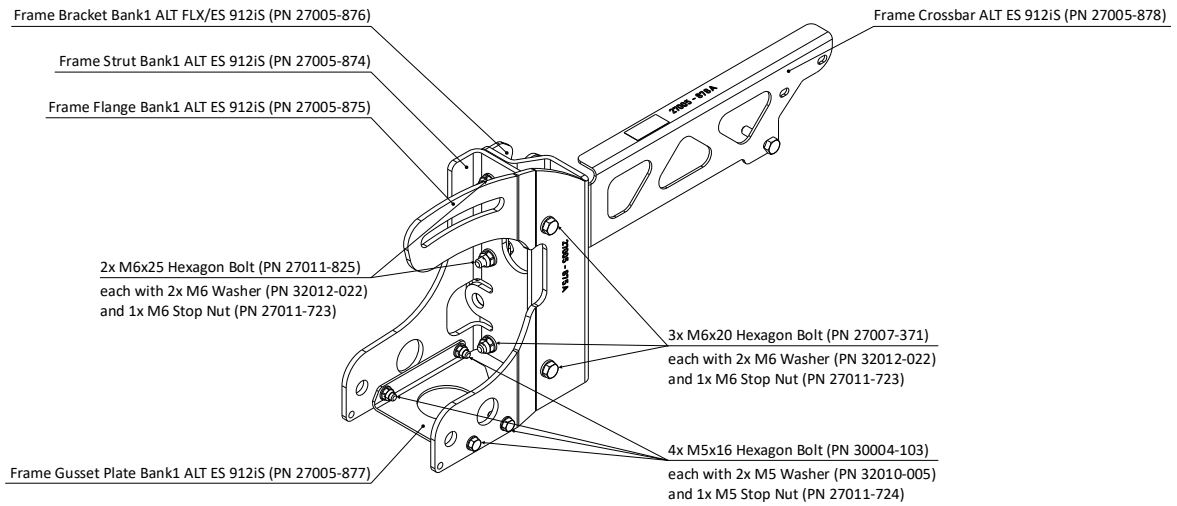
Isometric View Ext. Alternator Kit 70A Bank1 Rotax 912iS Frames
